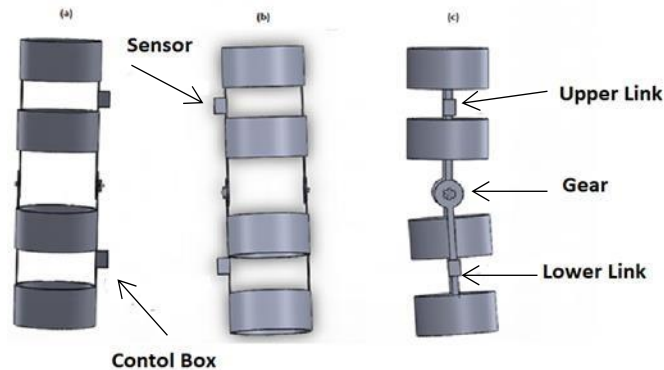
Overall Knee Orthotics Design – (a) Front view, (b) Back view, and (c) Side view
